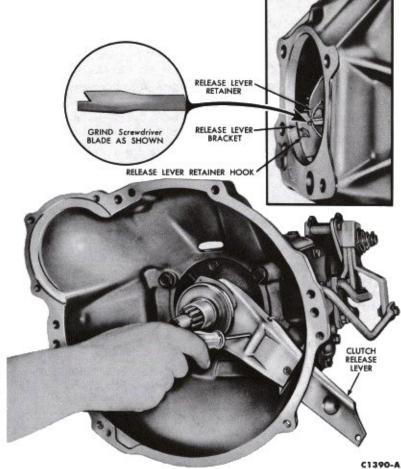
Removing or Installing Clutch Release Lever Retainer
